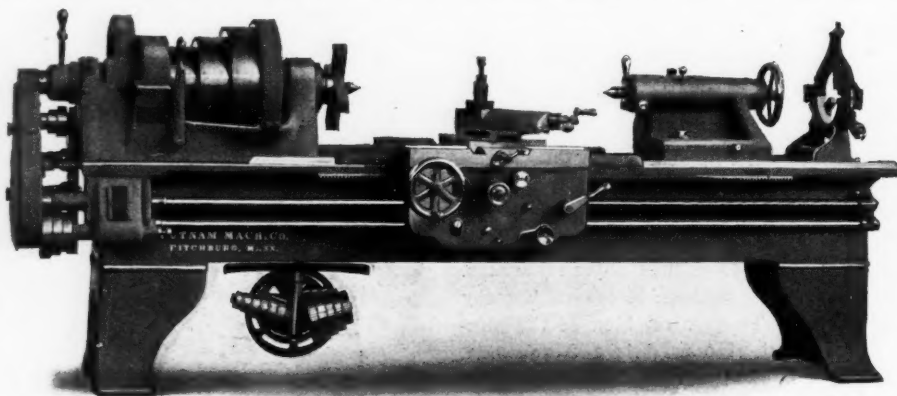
Putnam 22-inch Engine Lathe with Compound Rest, Tailstock and Back Rest
